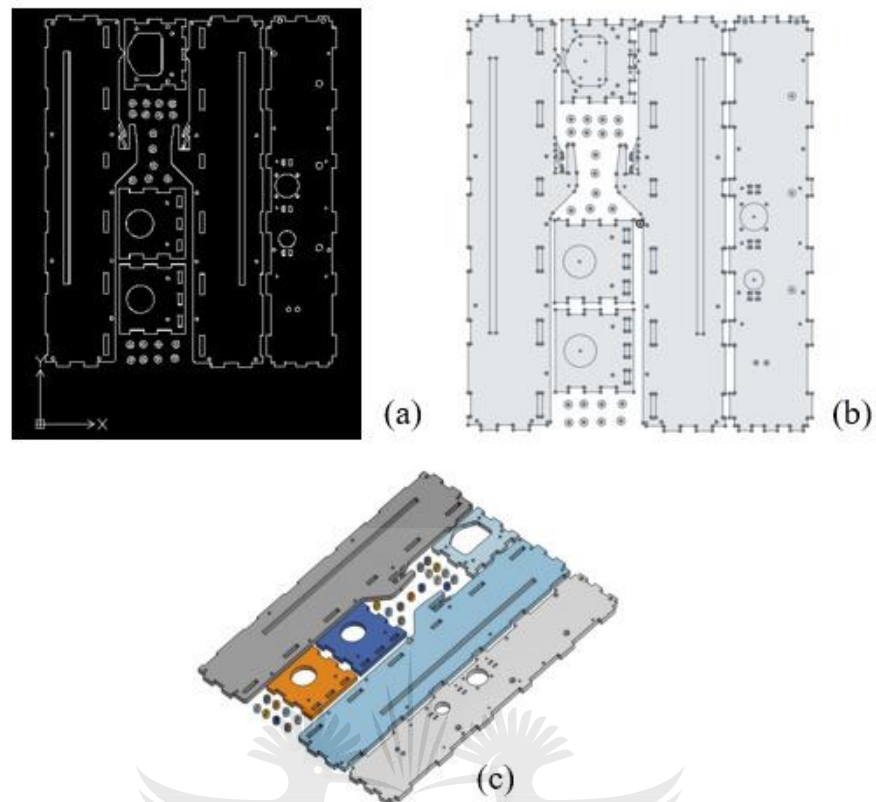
Carriage plates (a) and electronic cover parts, (b) laser-cut from 3 mm and 1 mm aluminium sheets, respectively.
